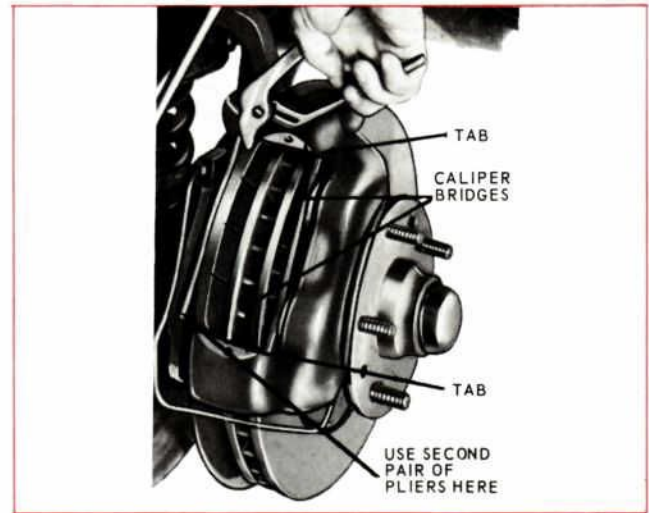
Removing Disc Brake Shoe And Lining Assembly
